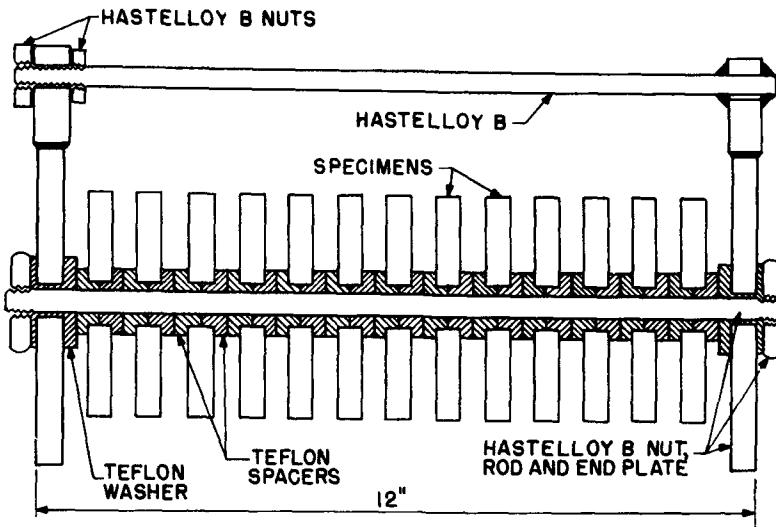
Spool assembly of metal specimens for corrosion tests.
